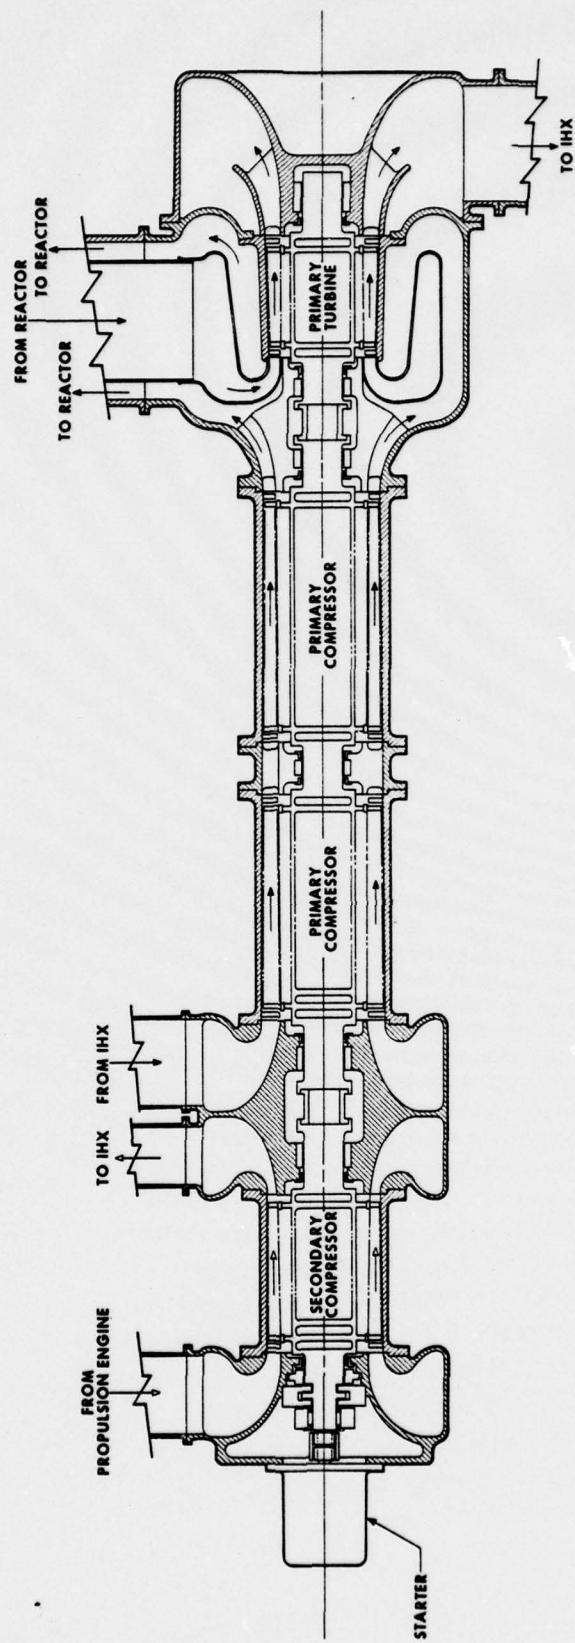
Bi-Brayton Turbomachinery Assembly
